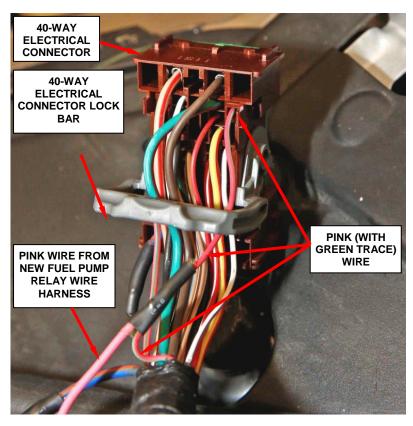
Install Pink (with Green Trace) Wire Terminal into the same cavity on the 40-Way Connector from which it was removed
